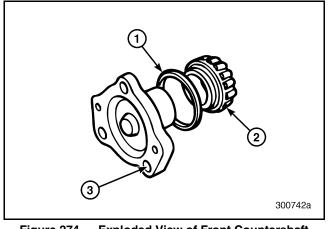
Exploded View of Front Countershaft Front Bearing Cover
